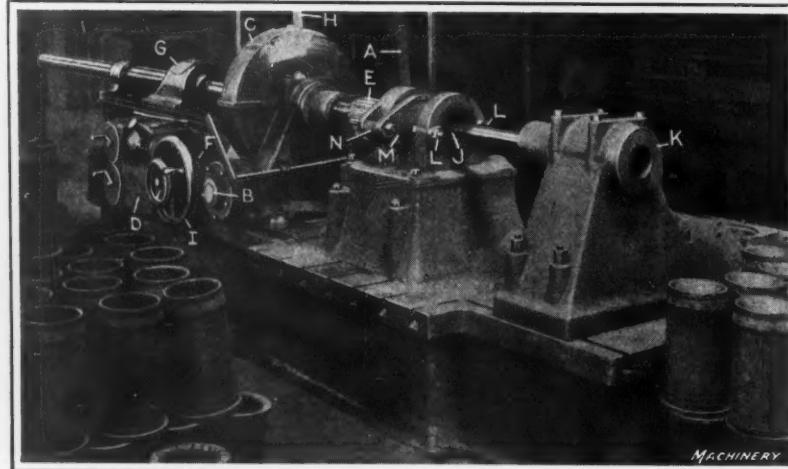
Special Horizontal Machine for reaming Liners for Tractor Engines
